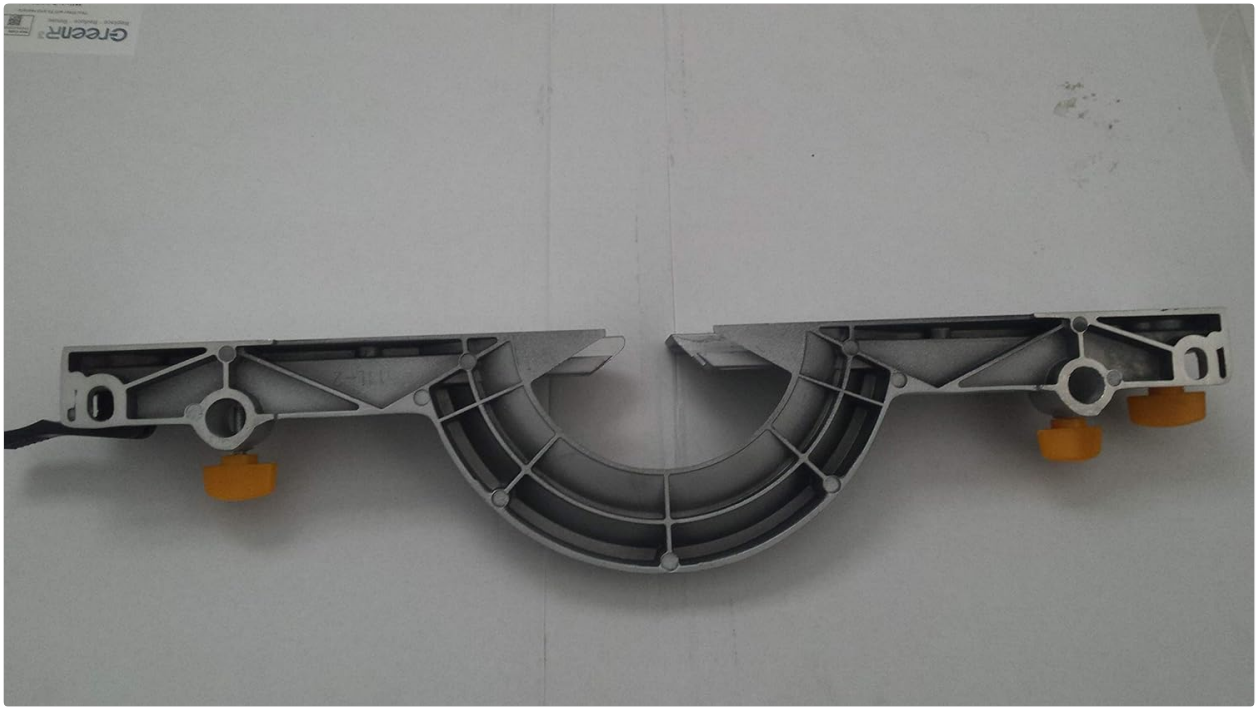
Underside view of the fence assembly, showing mounting points and structural design.
